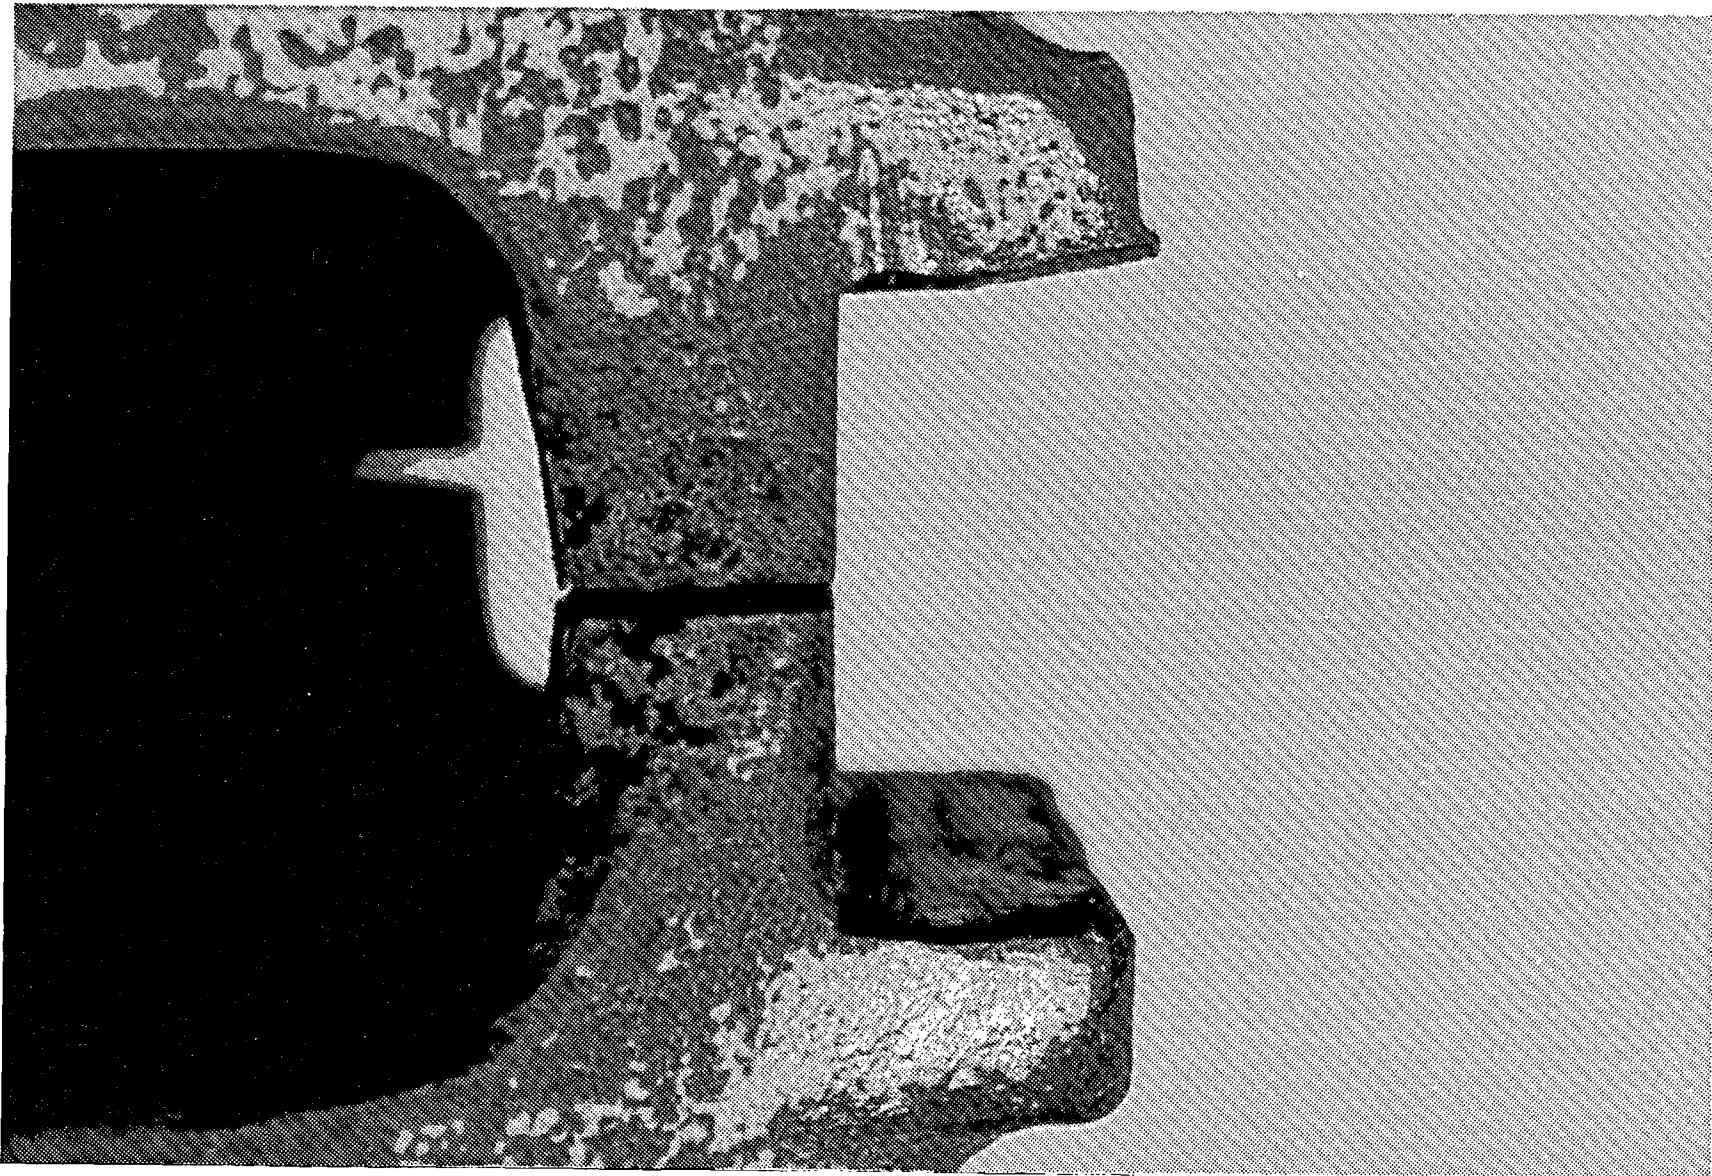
The Valve A disc, which shows sealing surface damage on the downstream face.
